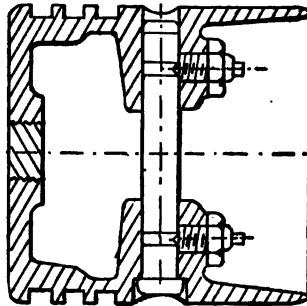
Section through a typical Trunk Piston for a Gasoline Engine. Around the circumference, near the rear end, are three circular grooves for inserting the packing rings. Through the central diameter is a perforation for admitting the piston pin, which is held in place by square-headed screws.
